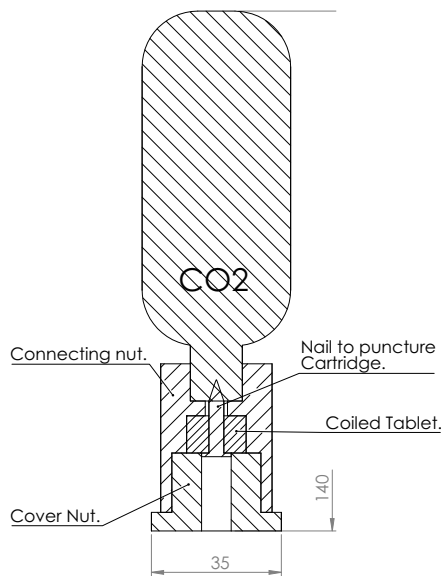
Cross-section of design 1.0. All dimensions in mm.
